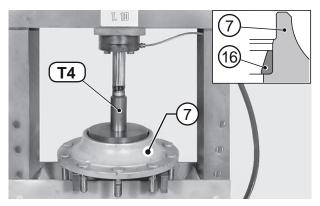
Position the wheel hub (7) under a press; lubricate the outer seat of bearing and, using tool T4 (See drawing T4 p. 28), install the thrust block of bearing (16).
